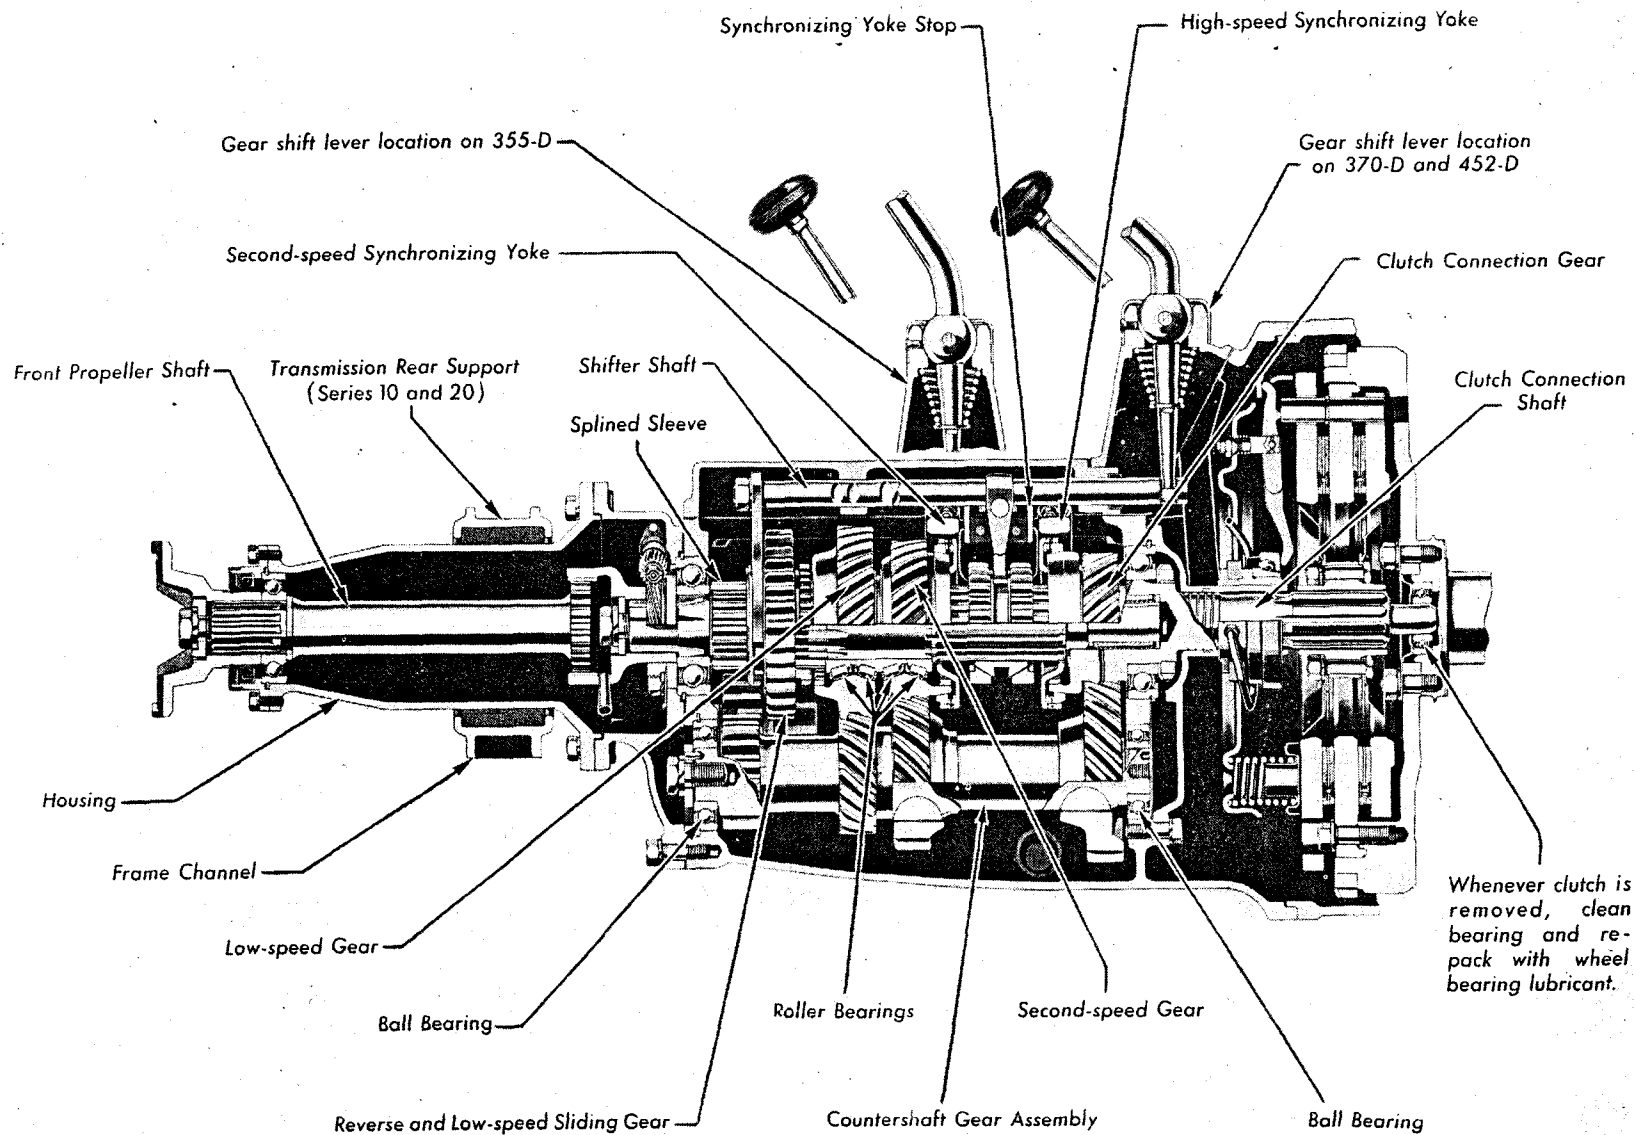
(Fig. 1) Sectional View of Transmission—Cadillac
